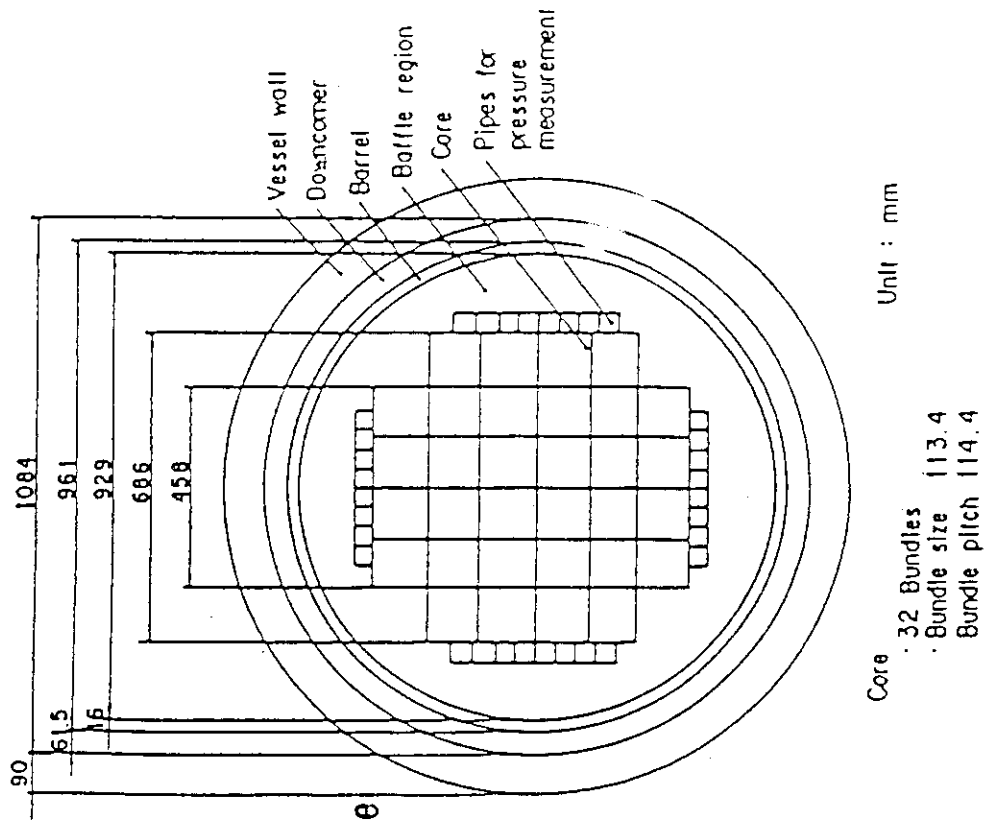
Dimension of CCTF Core-II pressure vessel cross section
